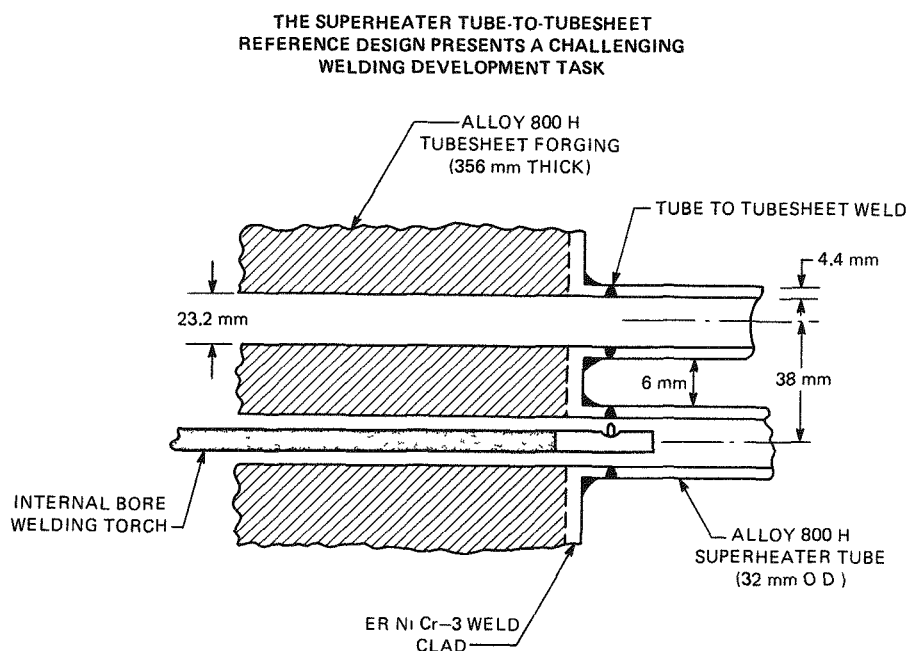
The internal bore tube-to-tubesheet welds will be made between alloy 800H tubing and a weld clad alloy 800H tubesheet forging.
